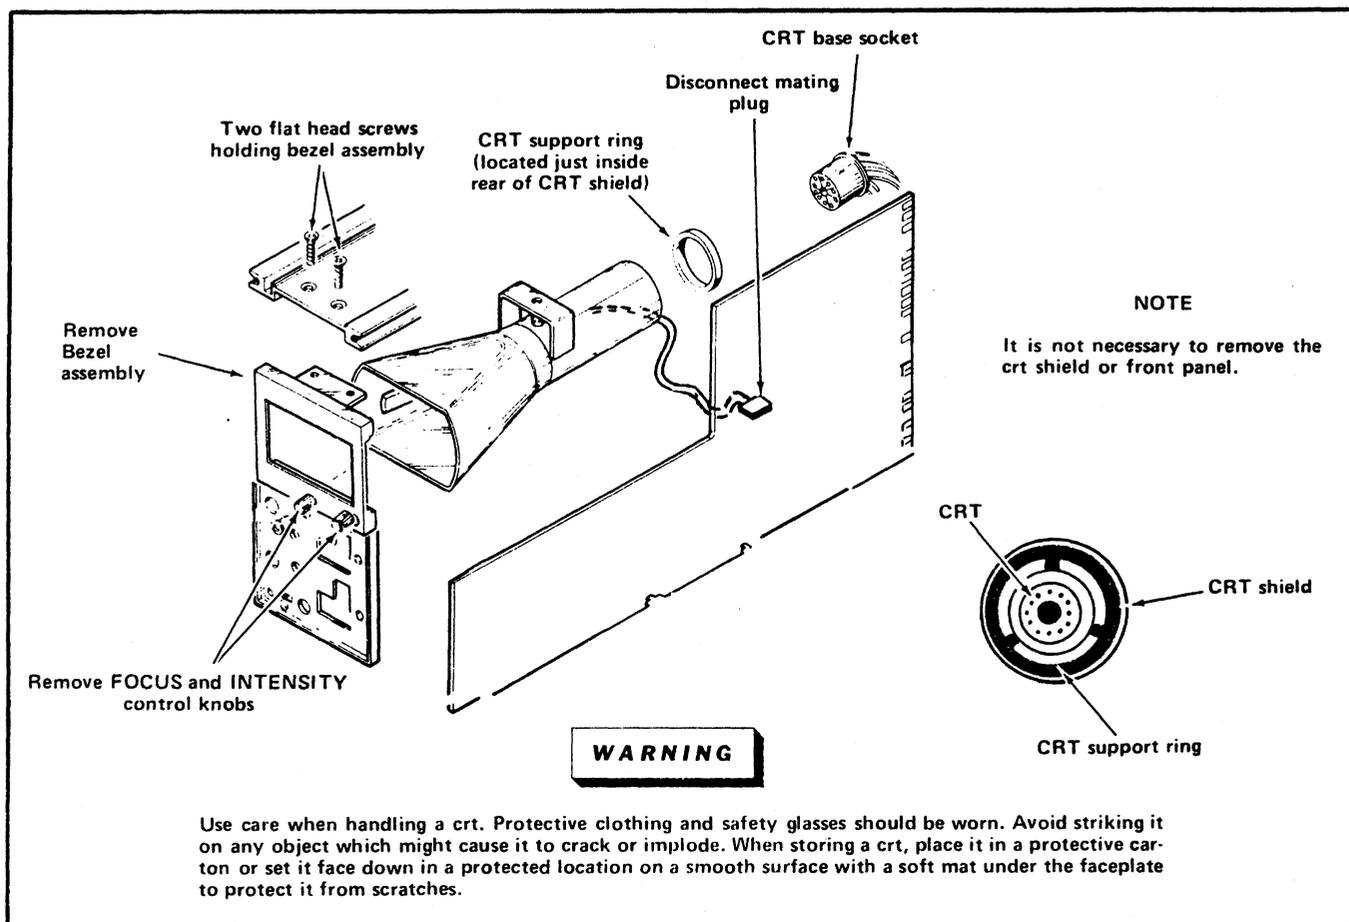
Exploded view drawing identifying several critical parts of the crt area.
